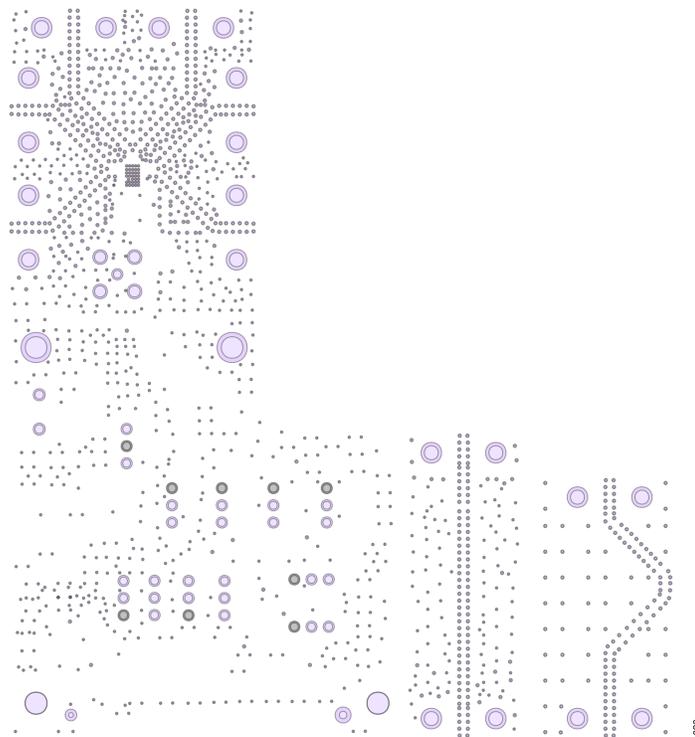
EVAL-ADGM1121SDZ Component Side Ground Plane PCB Drawing (Layer 2)
